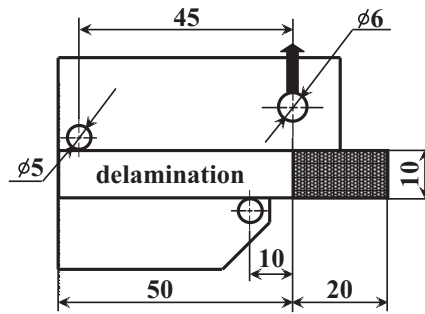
Loading of one half of the modified split cantilever beam specimen
